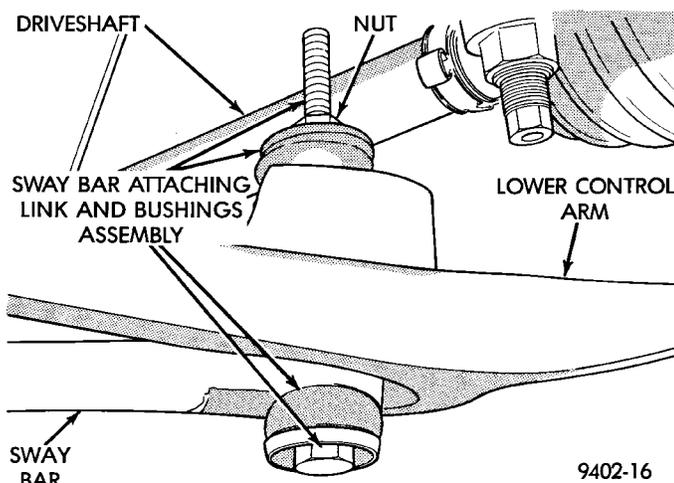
Stabilizer Bar To Lower Control Arm Attaching Links
